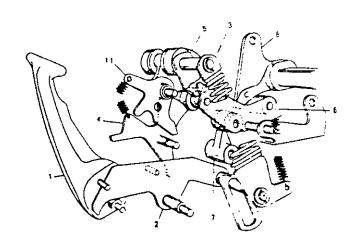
Mechanism ready to be charged by operator preparatory to closing of the circuit breaker contacts.
